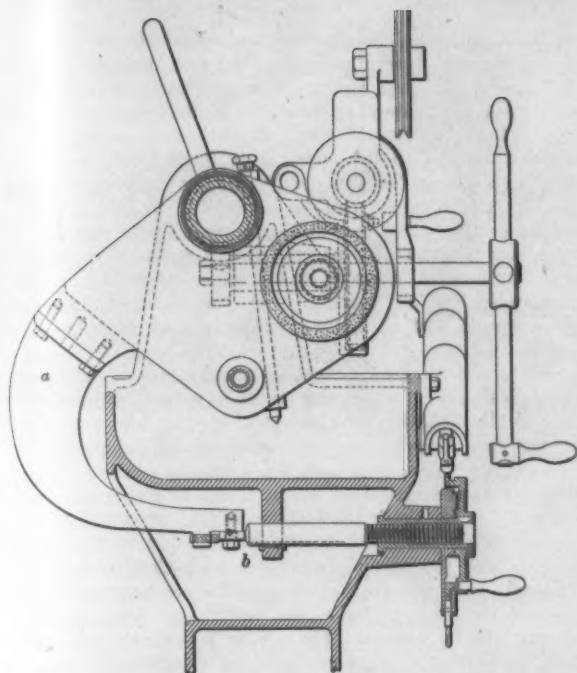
Sectional Elevation Giving Details of the Cross Feed Slide Motion
